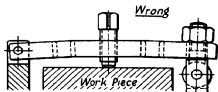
CLAMPING SCREW DESTROYS PARALLELISM OF AXES OF BUSHINGS
